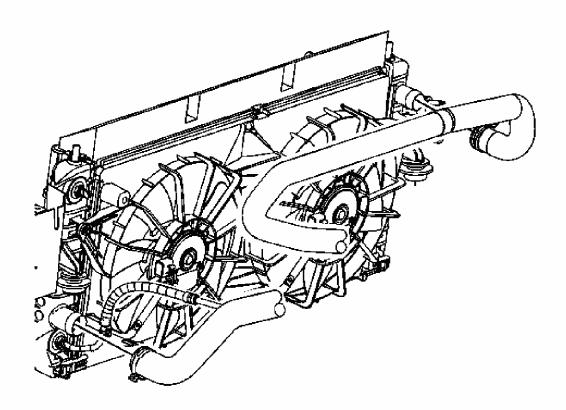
Identifying Radiator Outlet Hose Courtesy of GENERAL MOTORS CORP.
